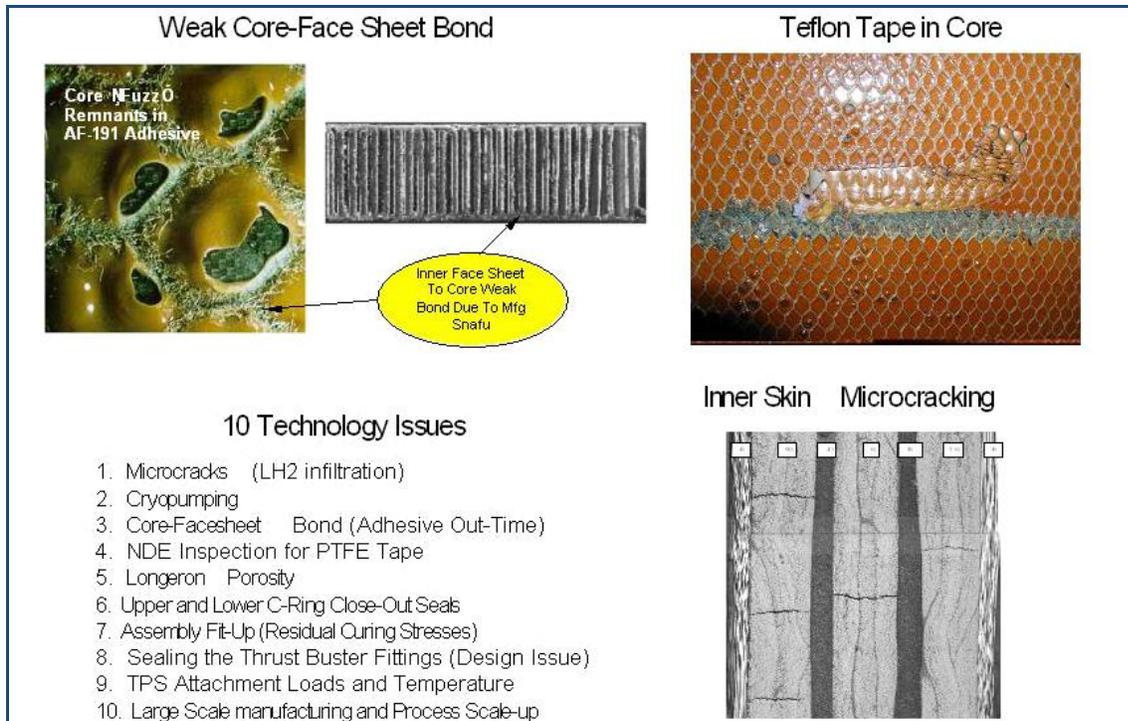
Technical Issues that Contributed to the Tank Failure
